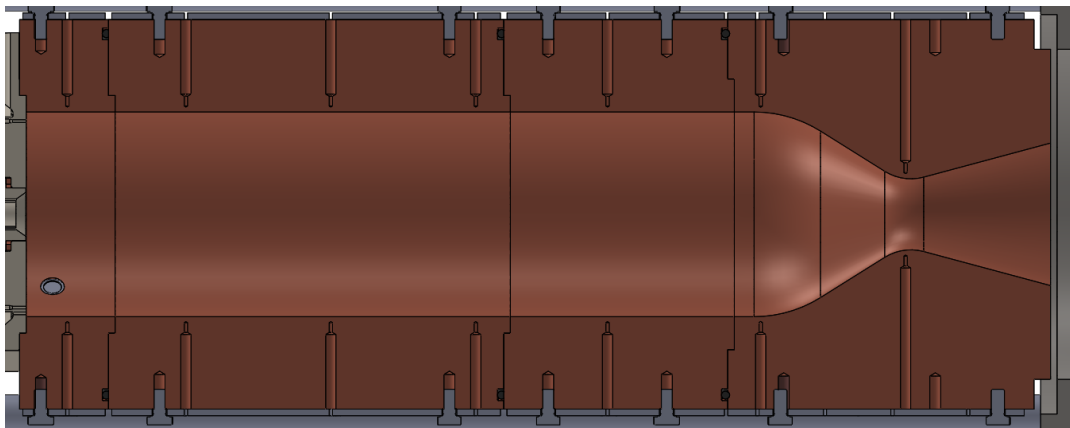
Section view of the Pressure-scaled subscale chamber used in the test campaigns, for azimuthal locations 3 & 7 (provided by Isar Aerospace SE)
